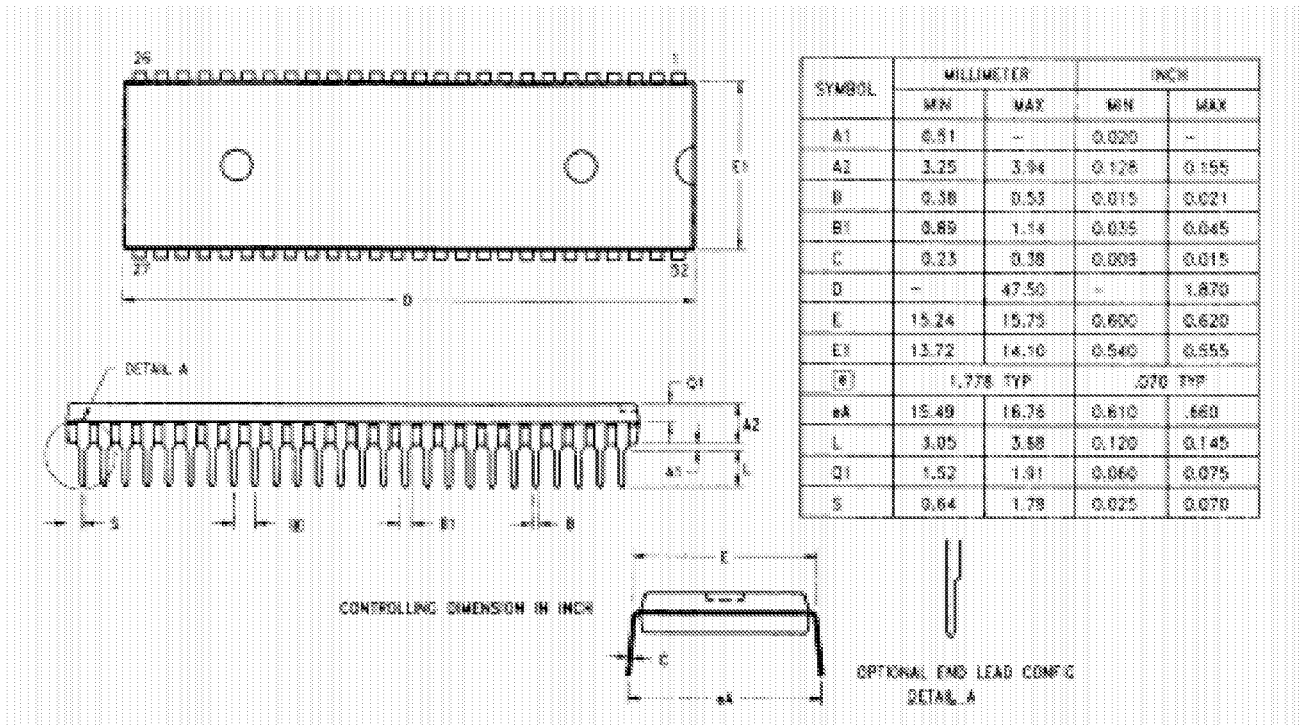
Z90371/6 52-Pin SDIP Package Dimensions
